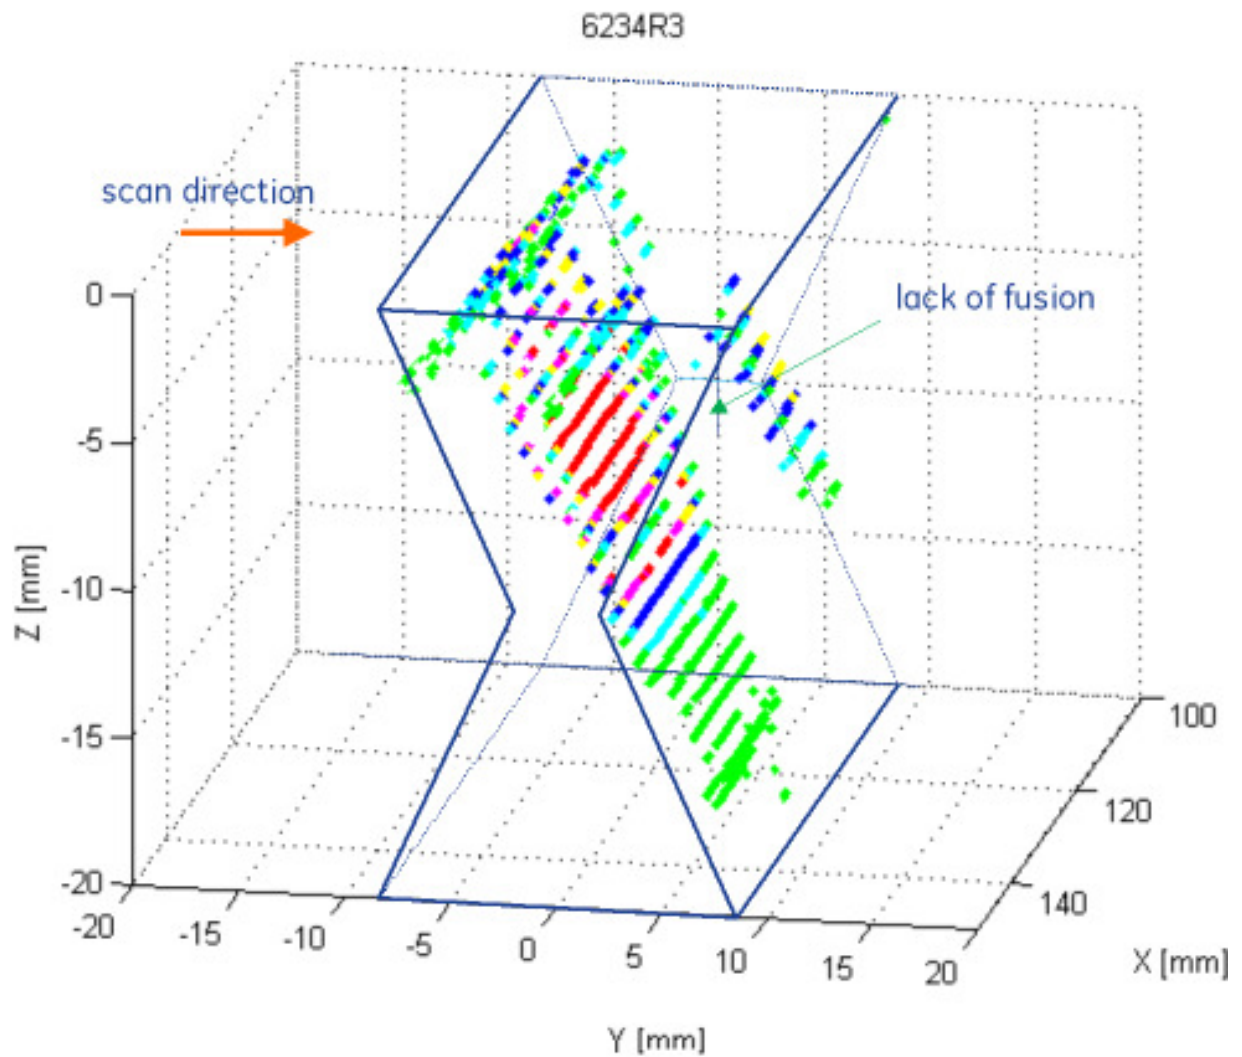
3D close-up view of the lack of fusion defect in weld 6234 (MATLAB)
